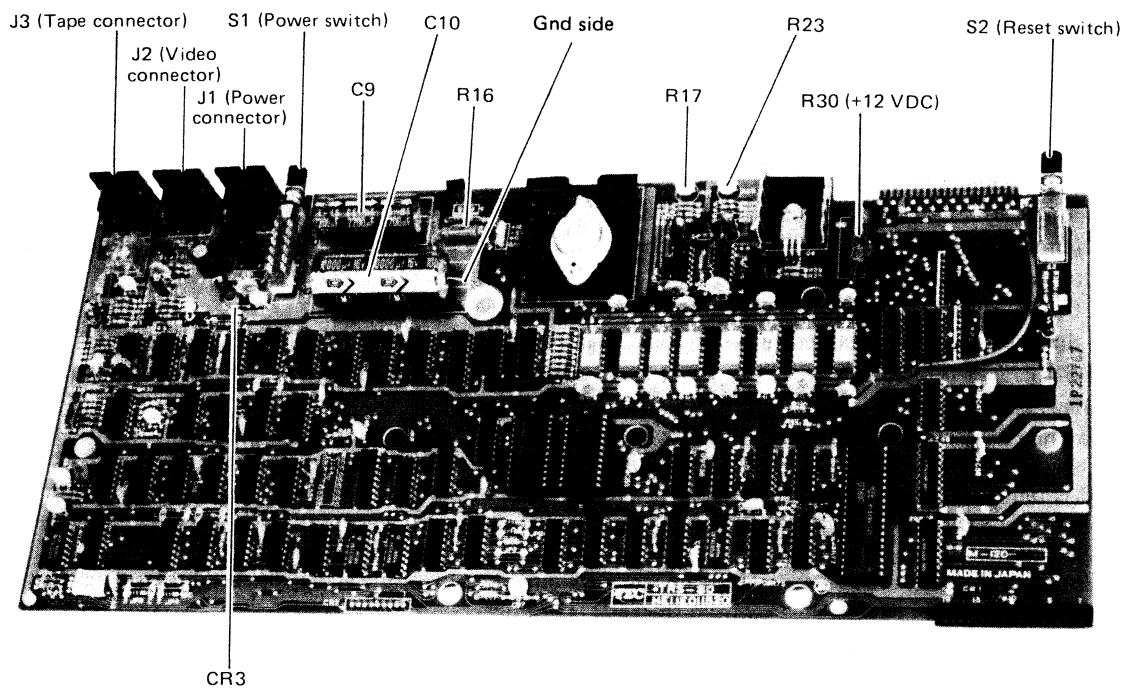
LOGIC ASSEMBLY PRINTED CIRCUIT BOARD
